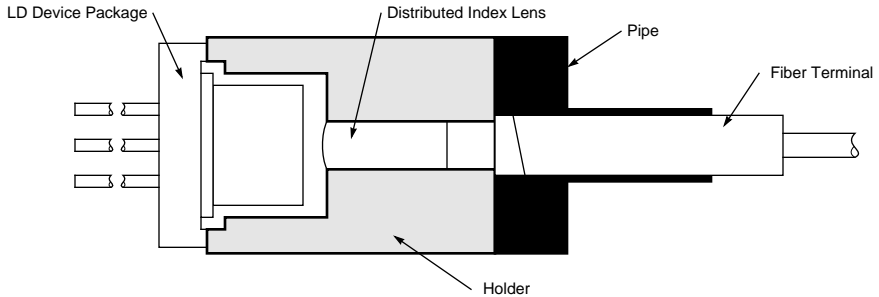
OKI Laser Diode Coaxial Package Cross-Section
